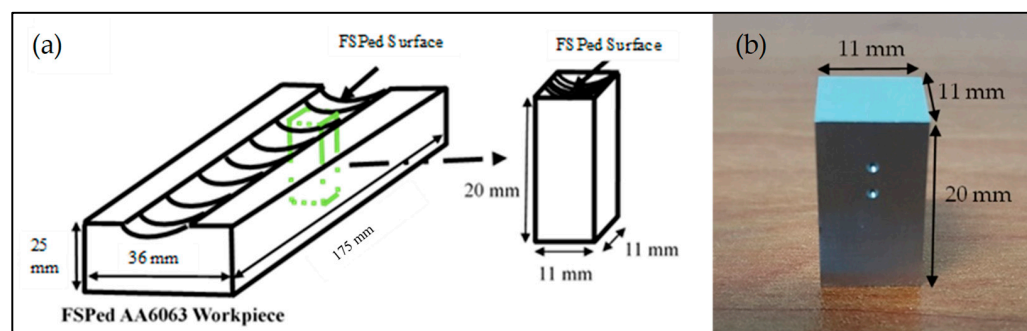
(a) Demonstration of test sample cut from the FSPed Workpiece [10] and (b) actual image for tribo-test pin.
